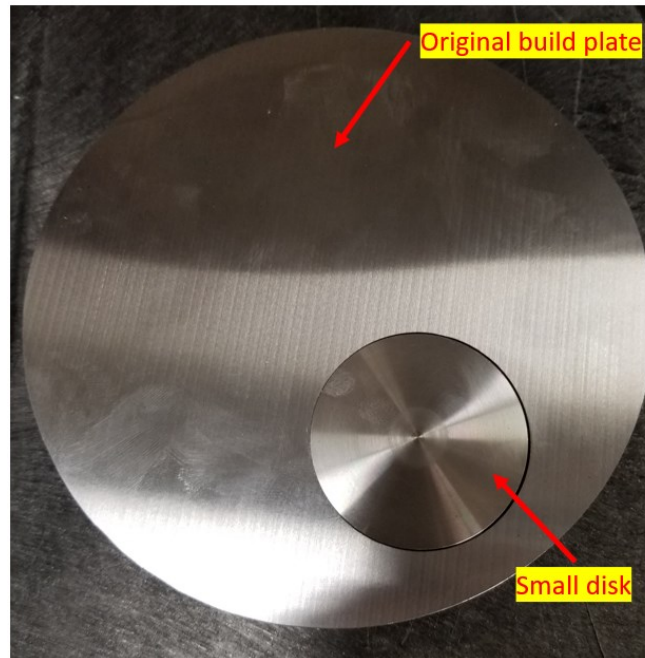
The modified build plate in which a small disk is located inside the original build plate. The samples were printed on the small disk.
